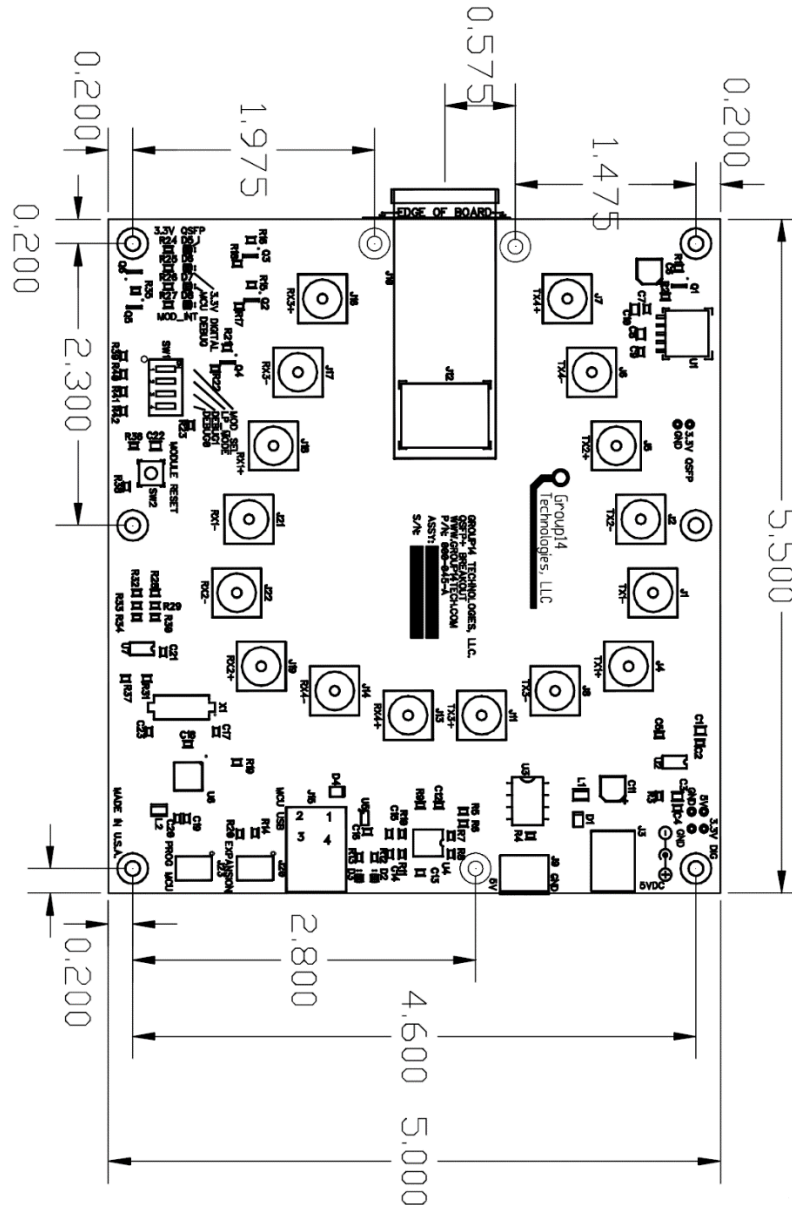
QSFP Breakout Physical Dimensions & Connections (Dimensions are in Inches)
